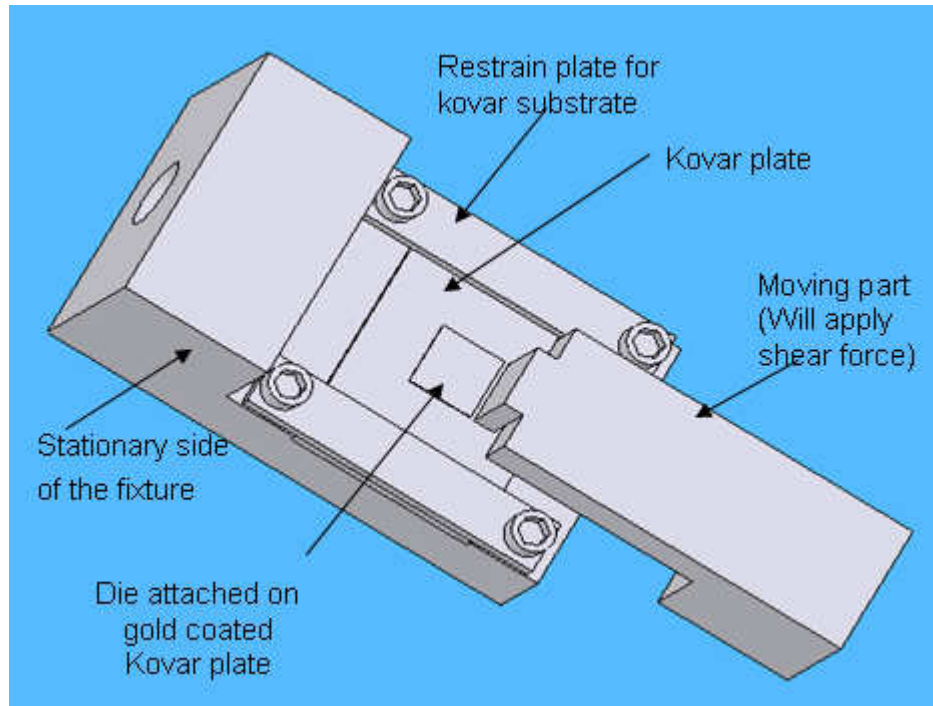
Changes made to the fixture to with no adjusting shear finger tip
